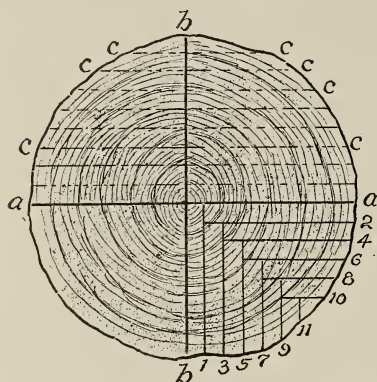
THE MAKING OF ORDINARY BOARDS, AND ONE WAY OF MAKING "QUARTERED" BOARDS.
